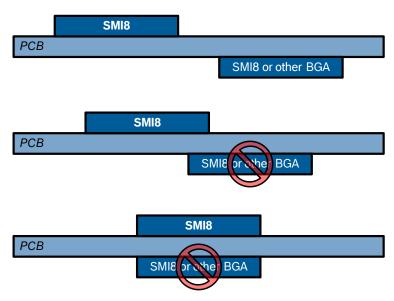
PCB guidelines SMI8 or other leadless SMD package
